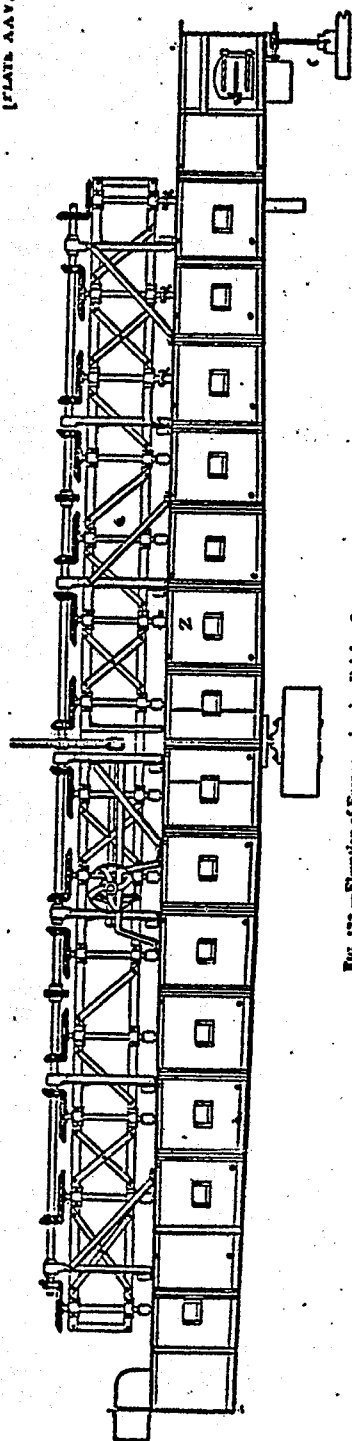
Elevation of Furnace, showing Driving Gear.
